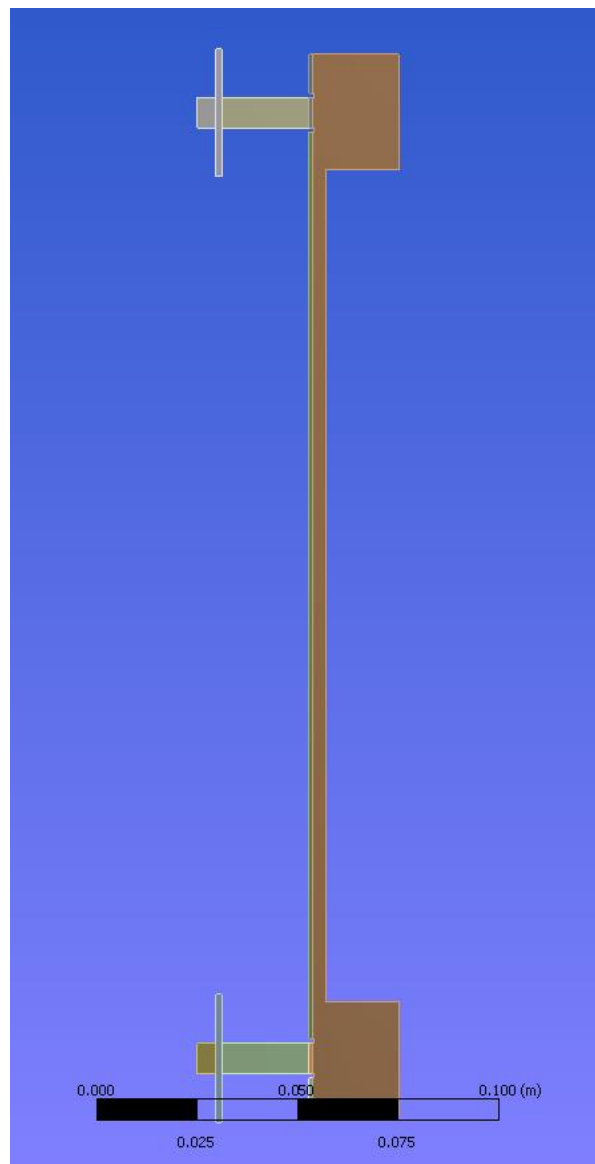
Shown is the model for a dual window and vacuum envelope braze assembly.
